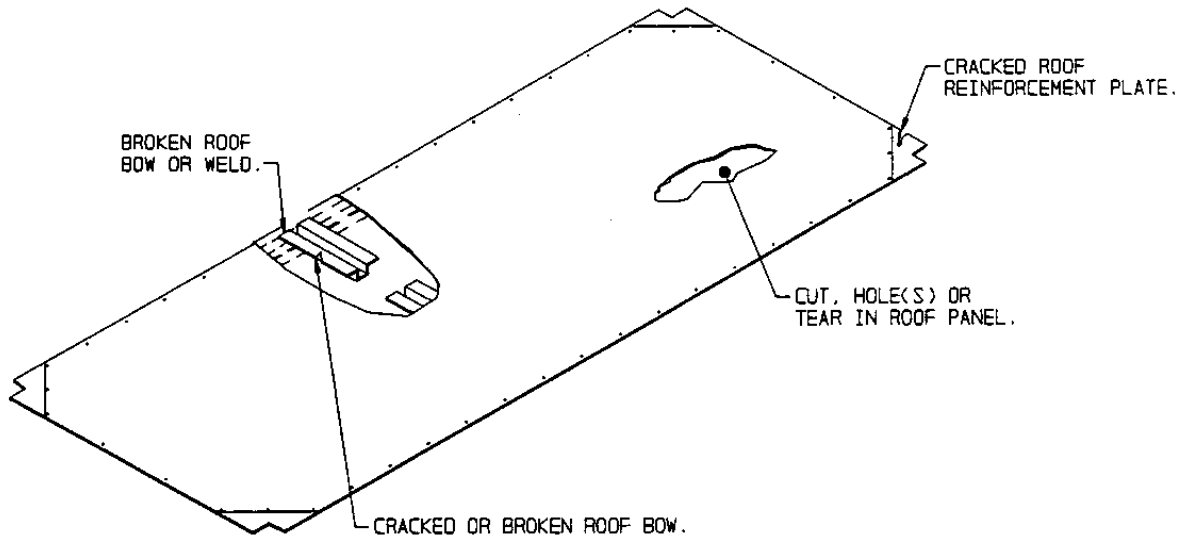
A - ROOF ASSEMBLY DAMAGE
